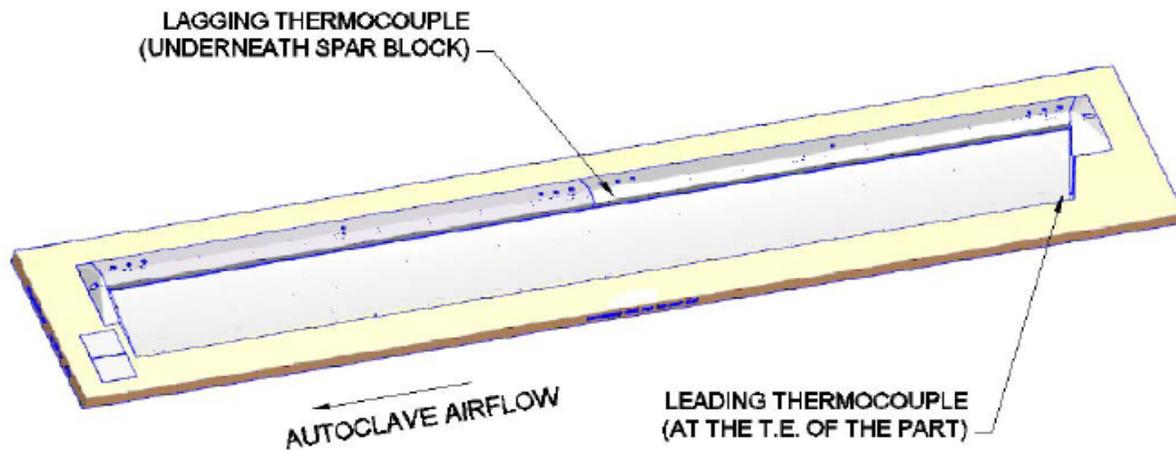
Thermocouple diagram showing placement of thermocouples on tool
